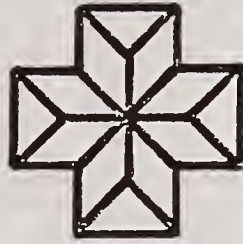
Cruciform wedge similar to those used in conjunction with Type 1 end fittings. All dimensions in inches (1 in = 25.4 mm).
